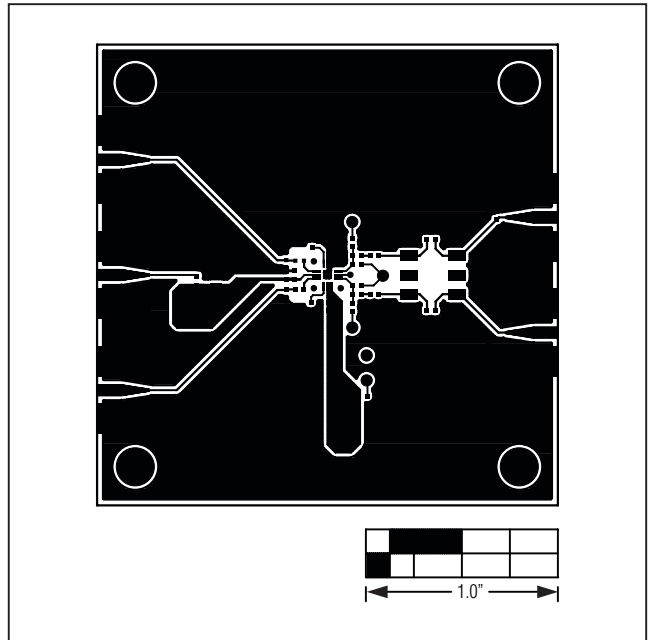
MAX9626 EV Kit PCB Layout—Component Side
